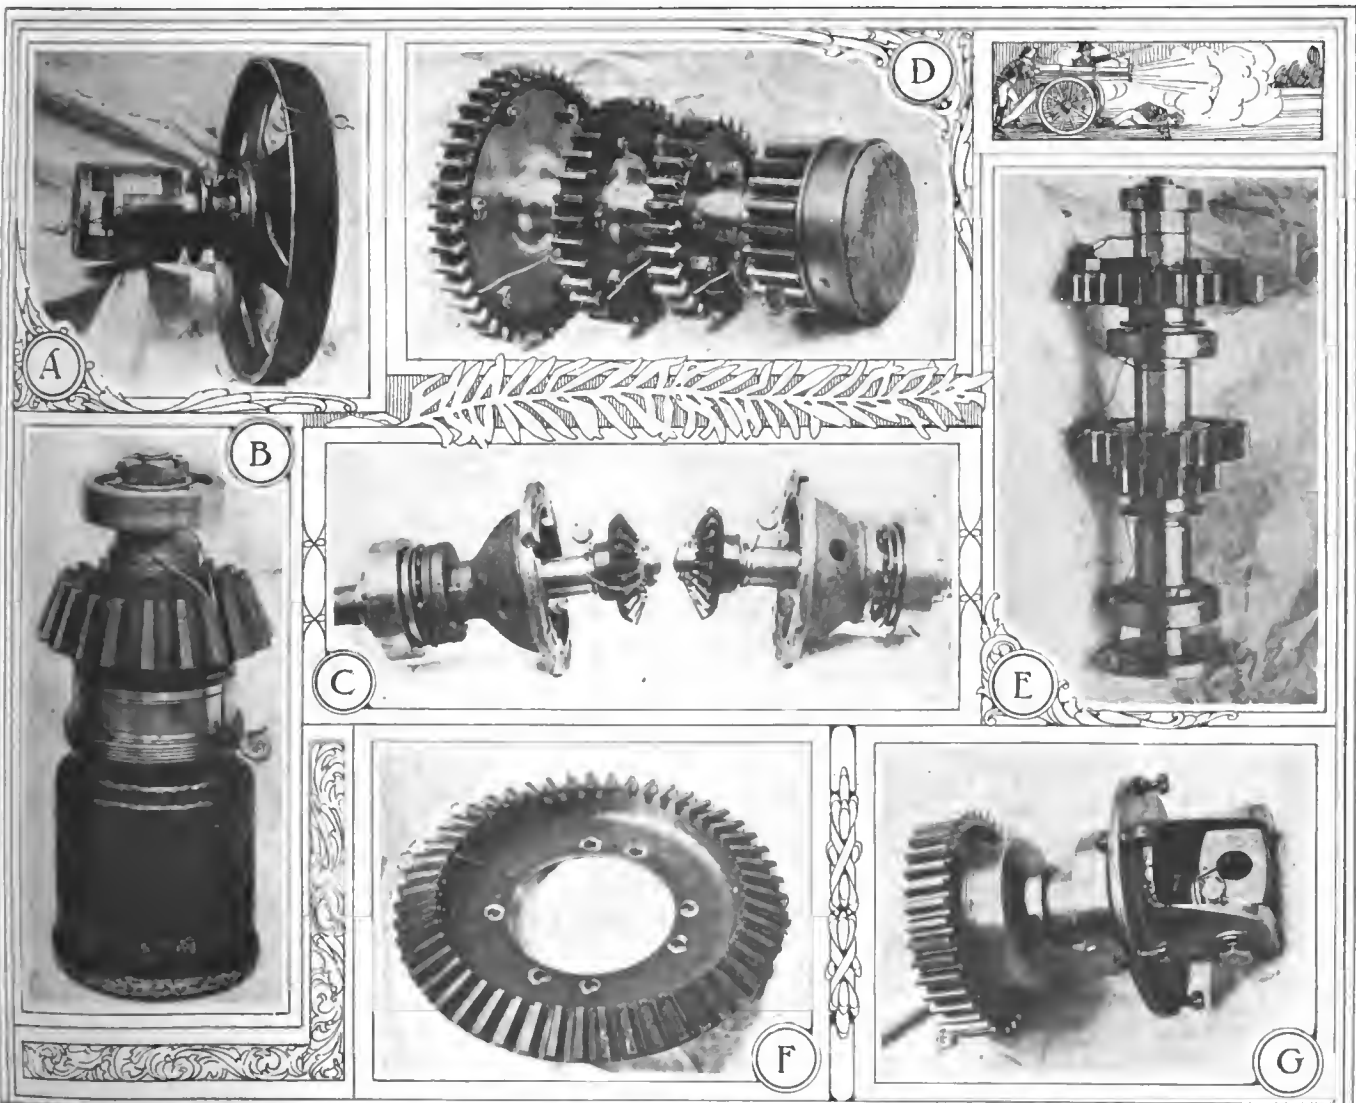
Transmission gears, bevel gear system, differential set, universal joints and clutch, as taken from a Hotchkiss car, by the R.A.C. Committee after an endurance run, showing the seals in place
